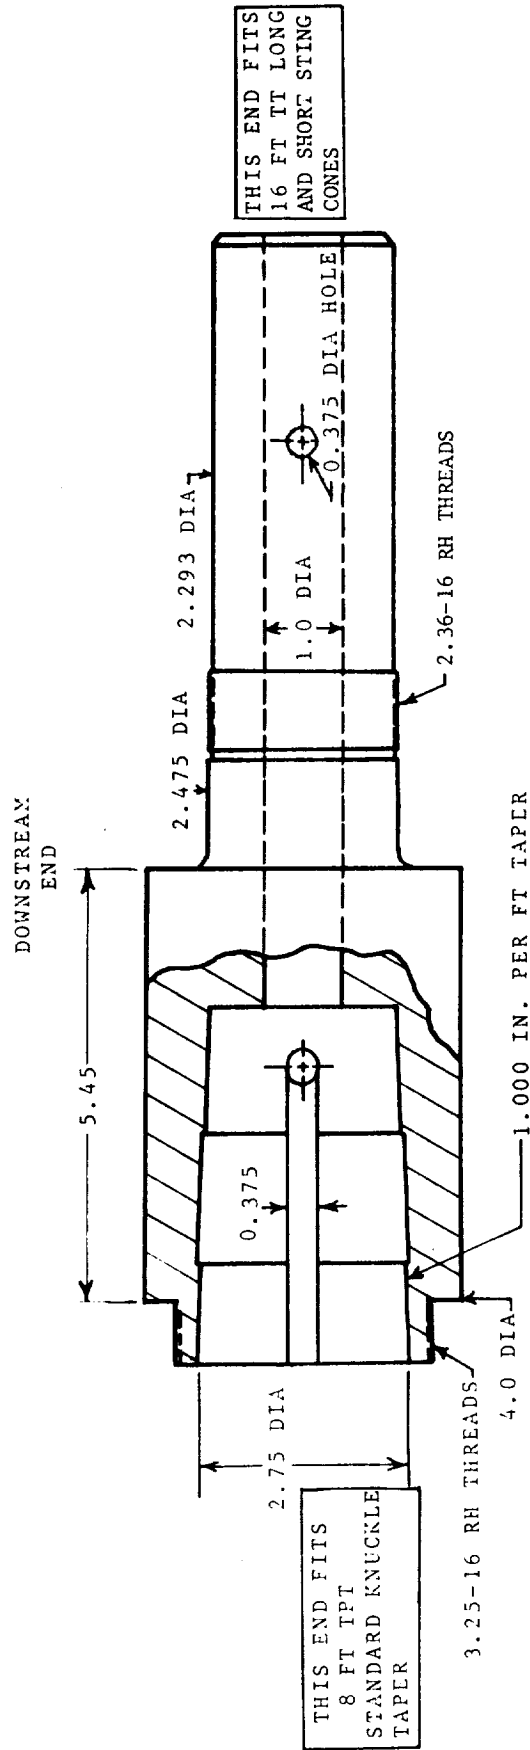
Sketch of adapter LD-44847 SH. 2. (All dimensions are in inches unless otherwise indicated.)
